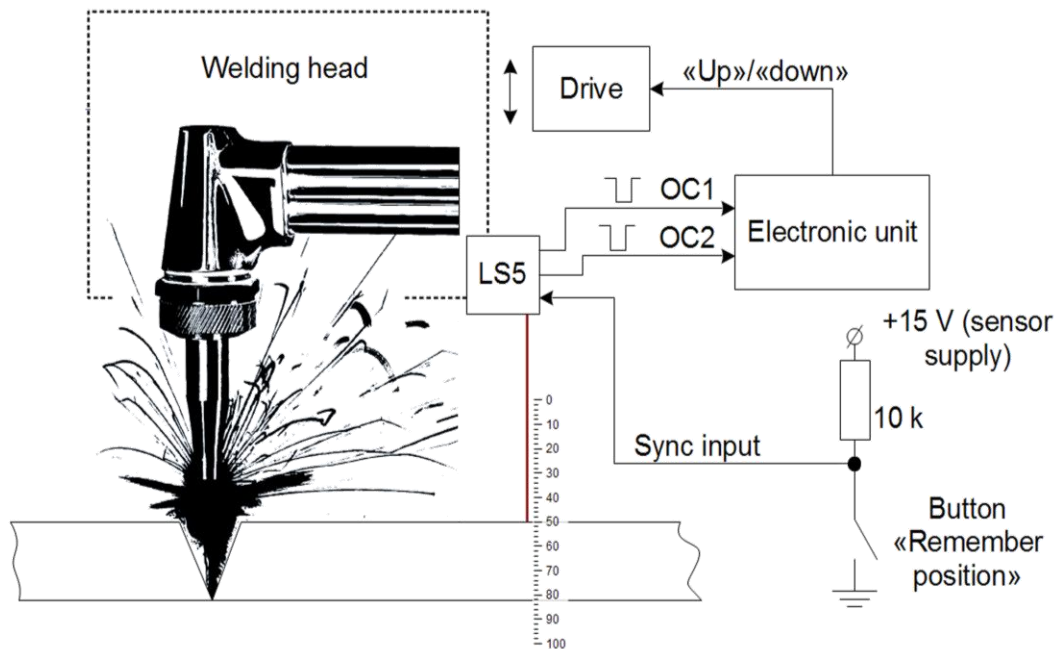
Functional diagram of the automatic system welding head positioning
